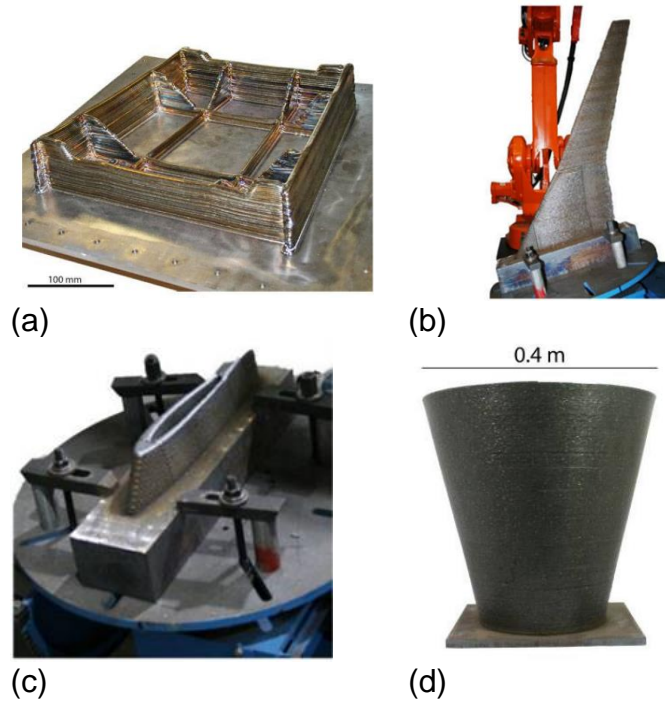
Examples of parts produced using WAAM technology (a) 1.2 m Ti-6Al-4V wing spar built for BAE Systems, top view (courtesy BAE Systems; process: PAWWAAM); (b) high strength steel wing model for wind tunnel testing (process: Fronius CMT WAAM), (c) particular of hollow structure, (d) mild steel truncated cone (process: Fronius CMT WAAM) Williams, S.W. *et al.* (2016).
